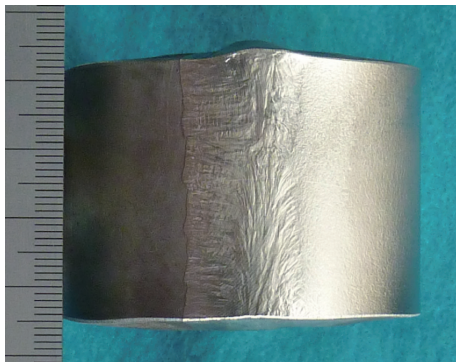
Results of side bend test for dissimilar metal pipe joint welding
